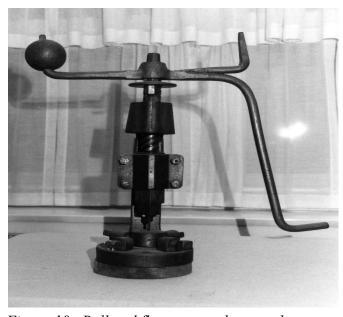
Ball and fly press used to punch center holes in wheel blanks.
